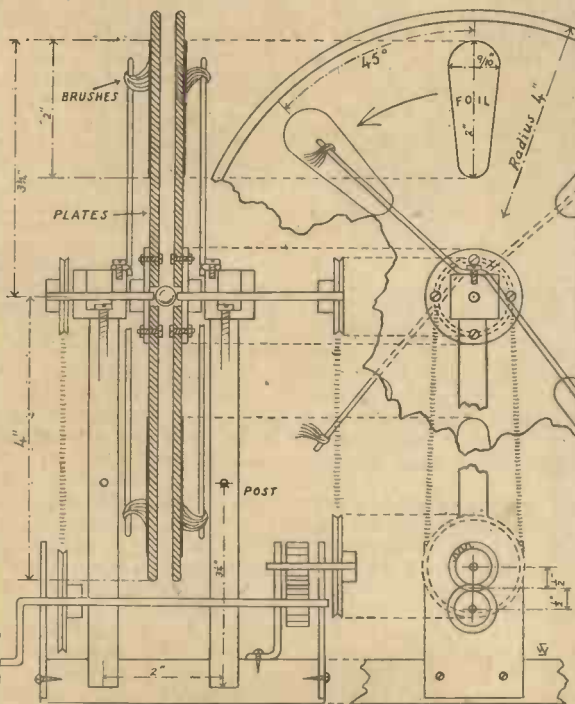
General details of the disc and its mountings; also method of connecting the brushes.
